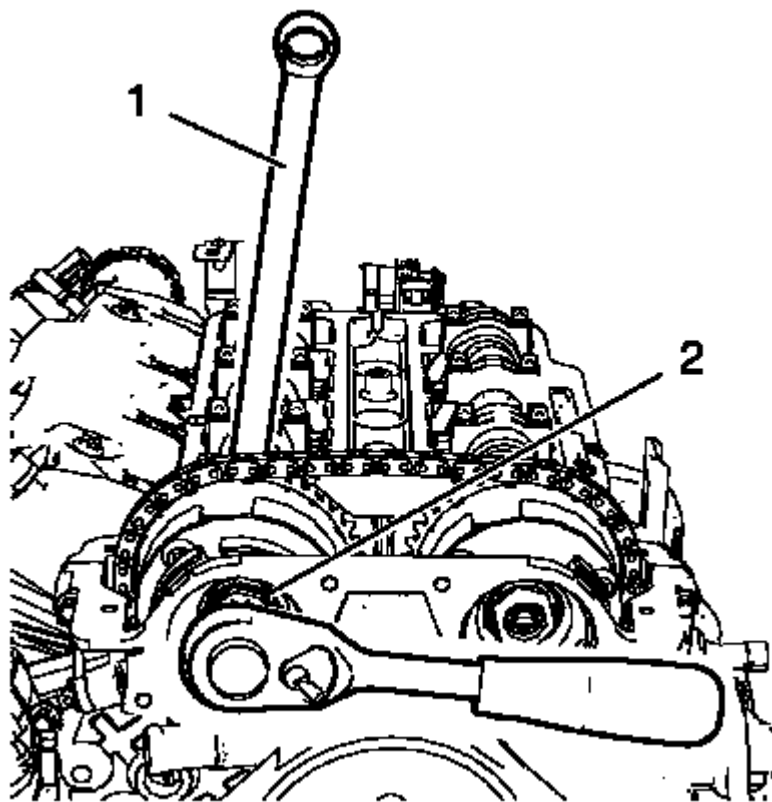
Intake Camshaft Sprocket Bolt And Hexagonal Wrench
